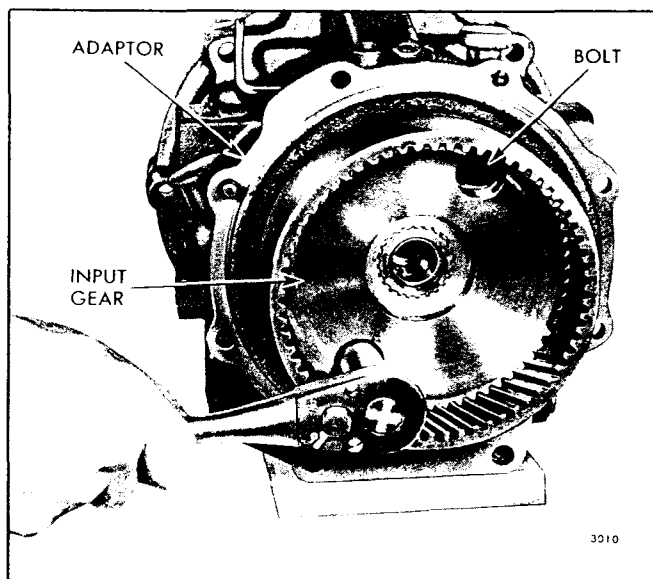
Removing Reduction Gear Adaptor to Reverse Gear Housing Bolts (1.5:1 Ratio)
